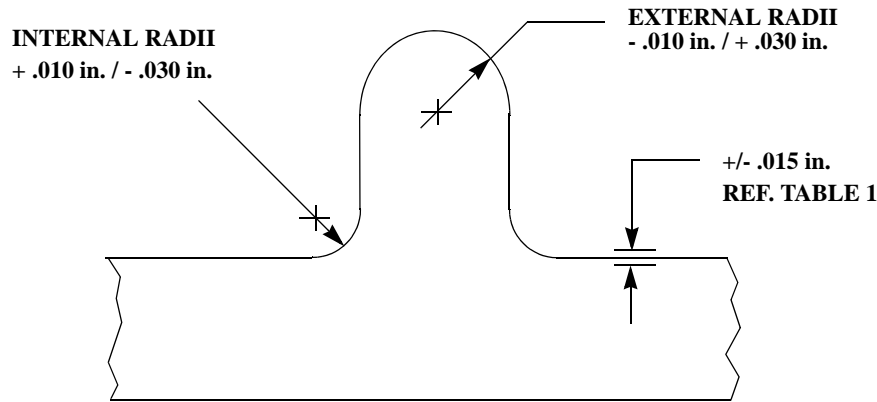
LUG RADII TOLERANCES (Lofted Machined Parts)
